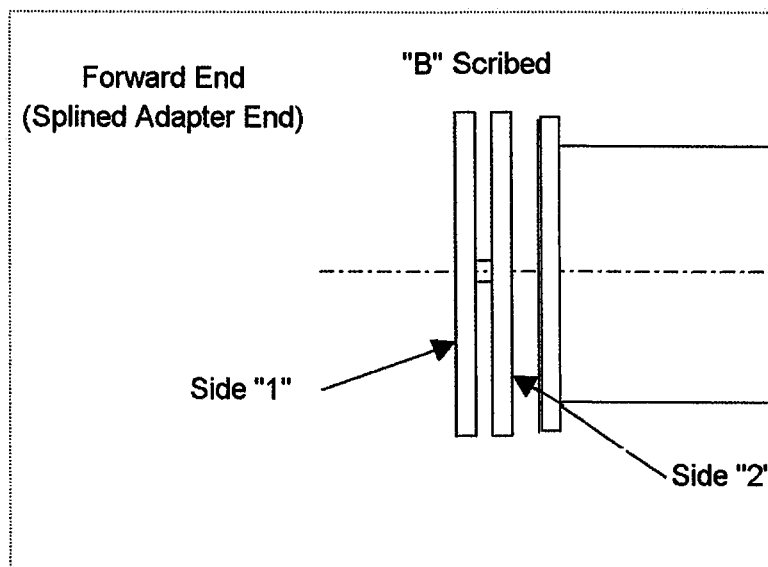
Forward End Bolt Layout for Sub Assembly Balance
